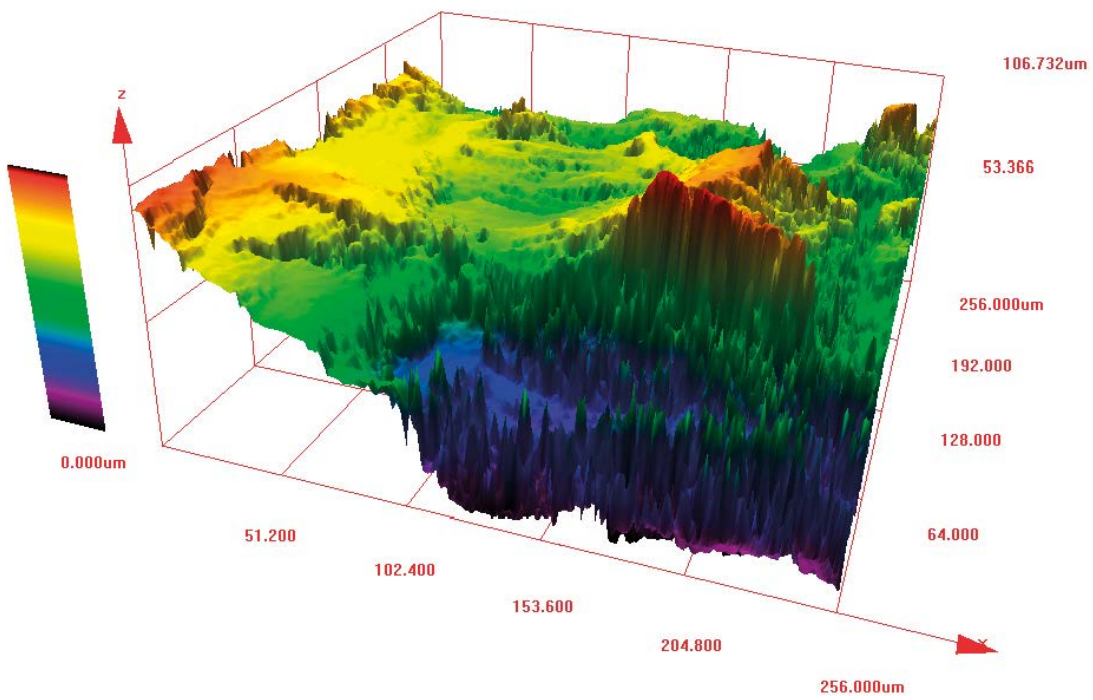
Confocal microscope image of the fracture face of WOL sample M4 3:1 showing the pre-crack surface rising up towards the ductile fracture surface on the left hand side of the image.
